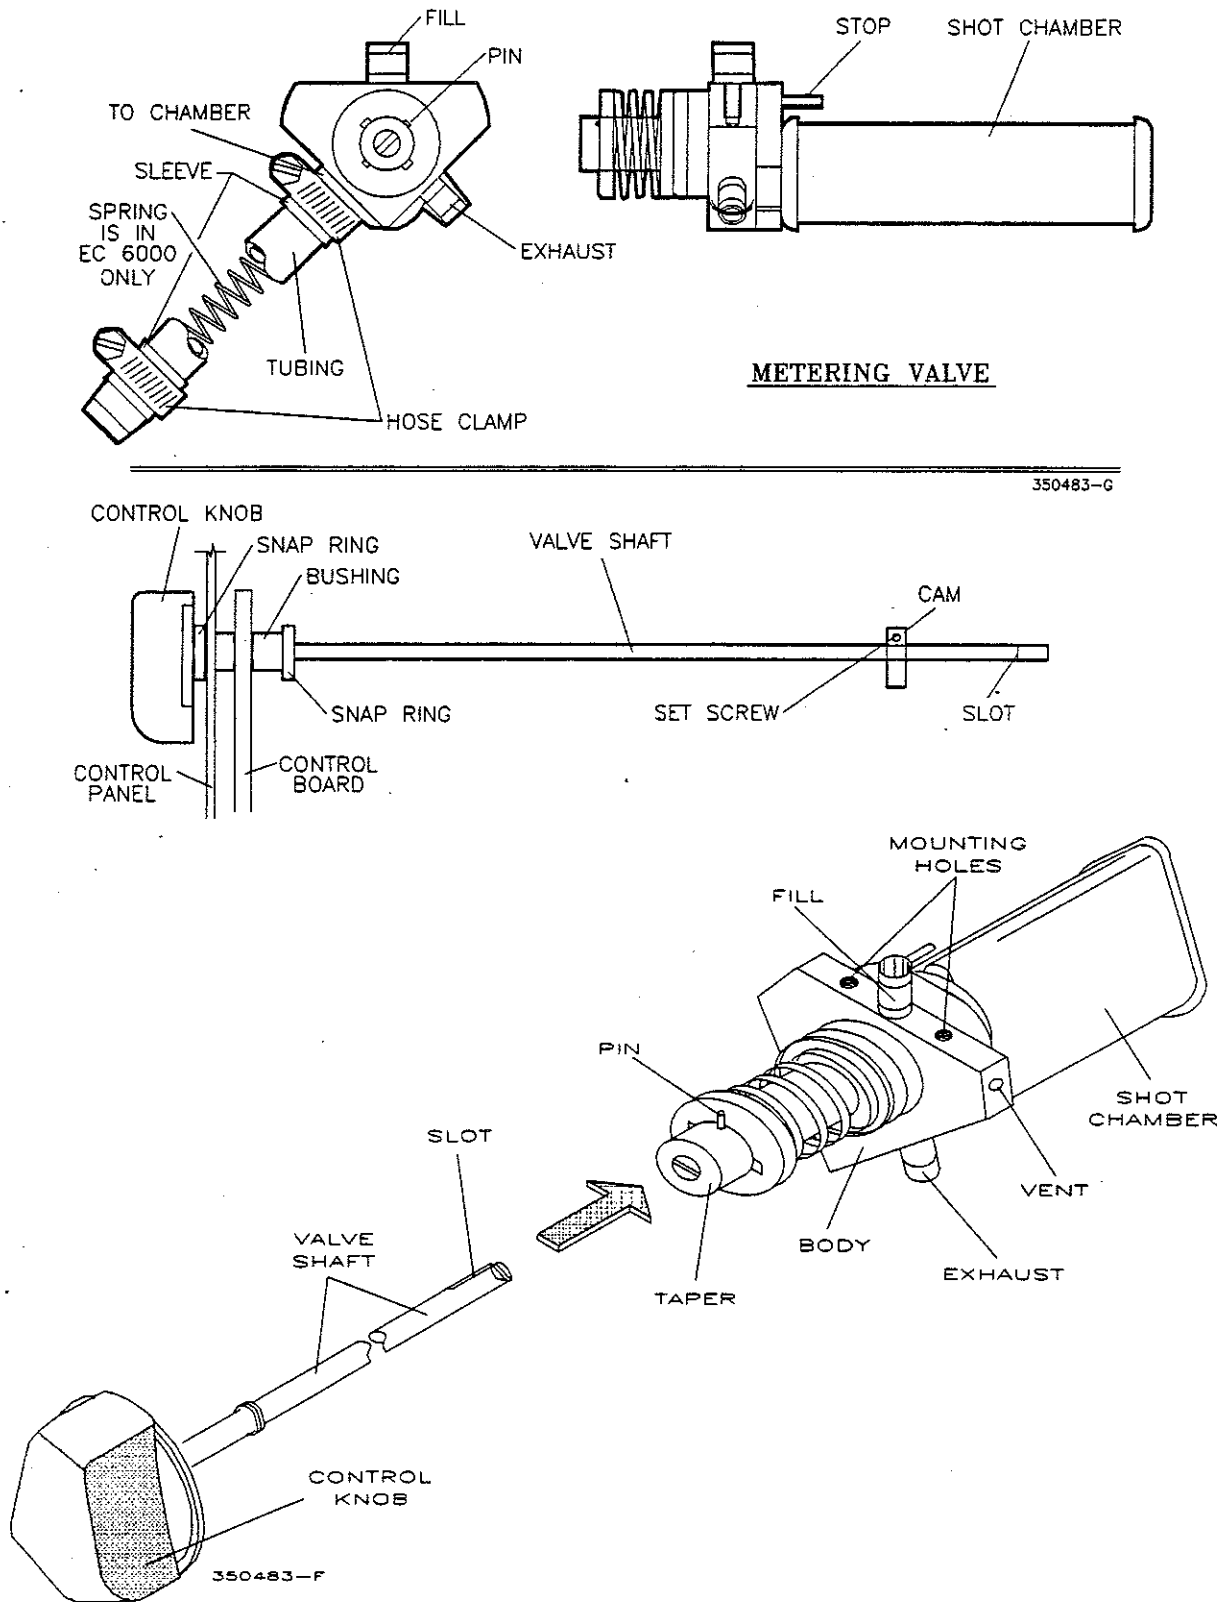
METERING VALVE MV1 (EC 5500 Shown)
